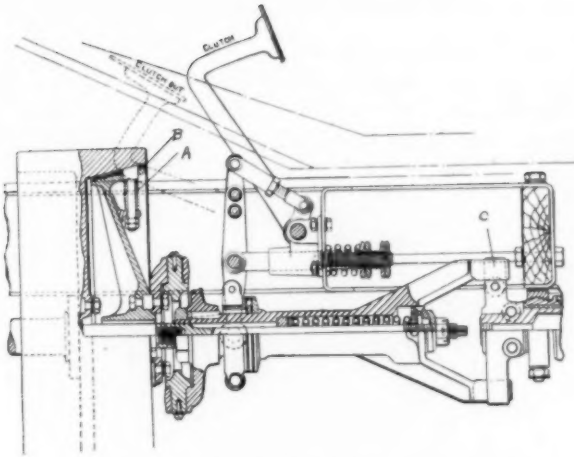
CONE CLUTCH FOR 50 H.P. AUTOMOBILE
